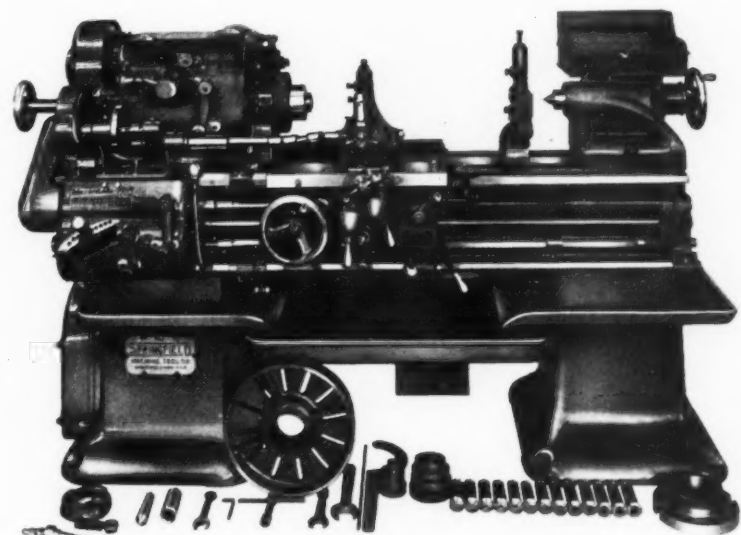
Springfield Tool-room Lathe Built to Produce Work to Metric Measurements
